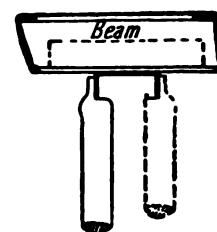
Arrangement for fitting Hold Shifting Boards between Pillars.
